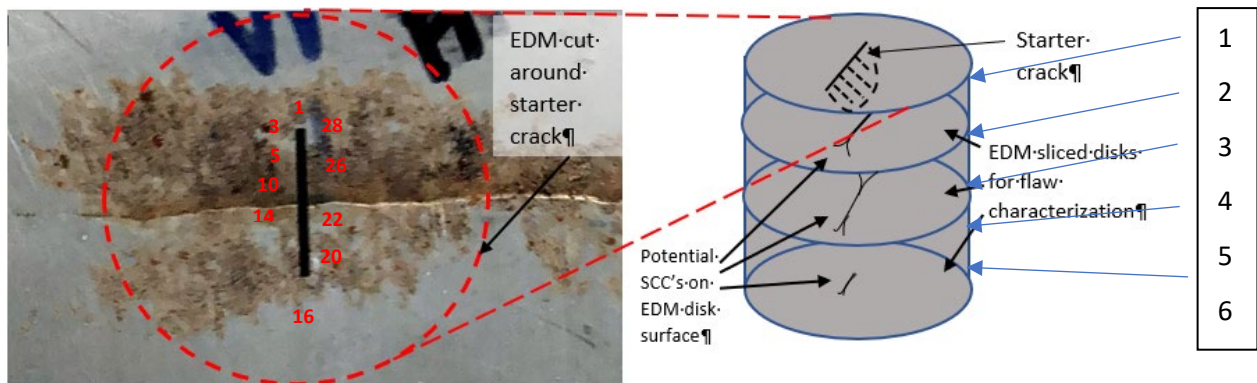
Schematic of serial sectioning of materials containing a starter crack VP-2 along the depth of the stress corrosion crack. Images from areas 1-13 and 24-28 are in the base metal. The other areas (14-23) are in the weld metal
